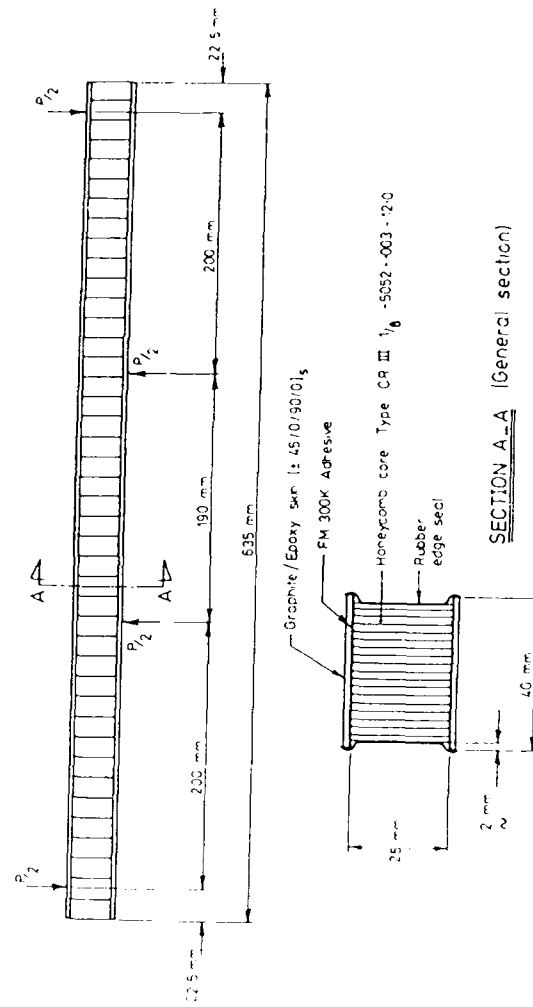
SCHEMATIC ILLUSTRATION OF SANDWICH BEAM TEST SPECIMEN, SHOWING LOADING POSITIONS.
